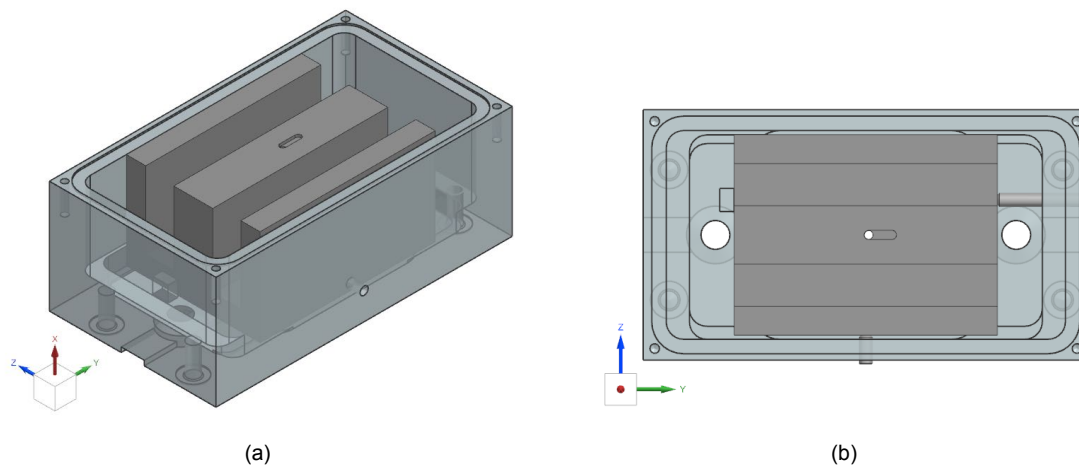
Stator housing with stator core inside: (a) oblique view, and (b) top view, with set screws for fixing the stator core.
